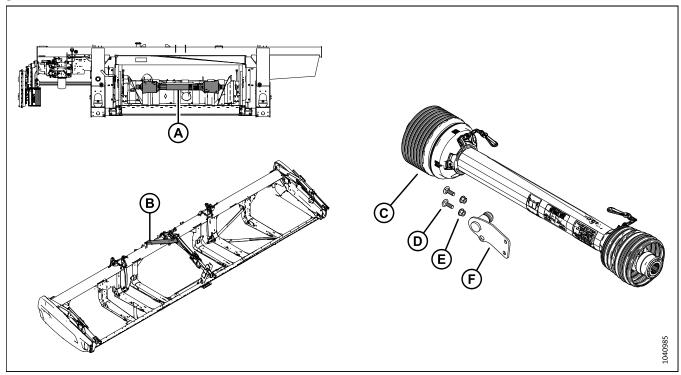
Driveline Shipping Locations and Driveline Parts
